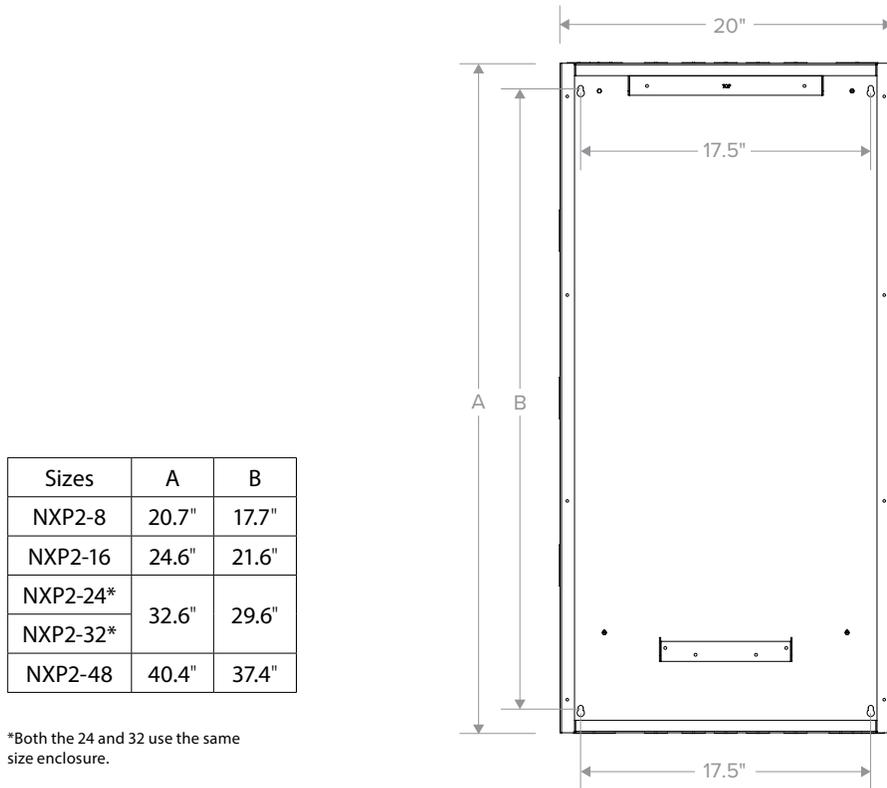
Different panel tub enclosure sizes with dimensions and mounting hole locations and distances between the mounting holes
